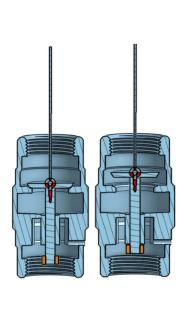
Plate open and plate closed position of valve, where the plate valve is connected to the spring system with a cable that goes through the eyebolt. The limit of plate opening is limited by a nut at the threaded end (as shown by the orange nut).
